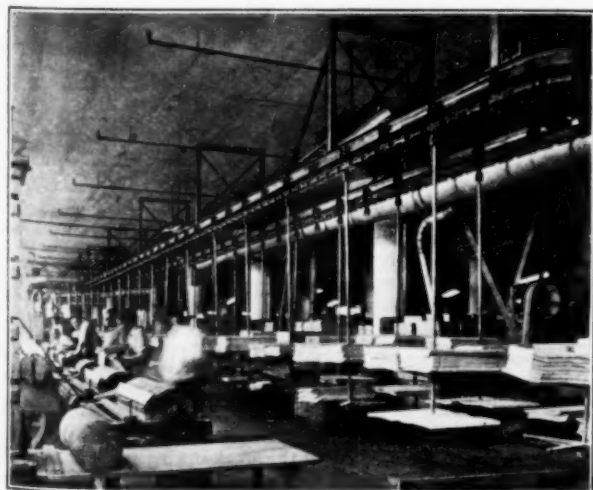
CONVEYOR FOR HANDLING STOCK BETWEEN SEVERAL SANDING AND INSPECTION OPERATIONS
